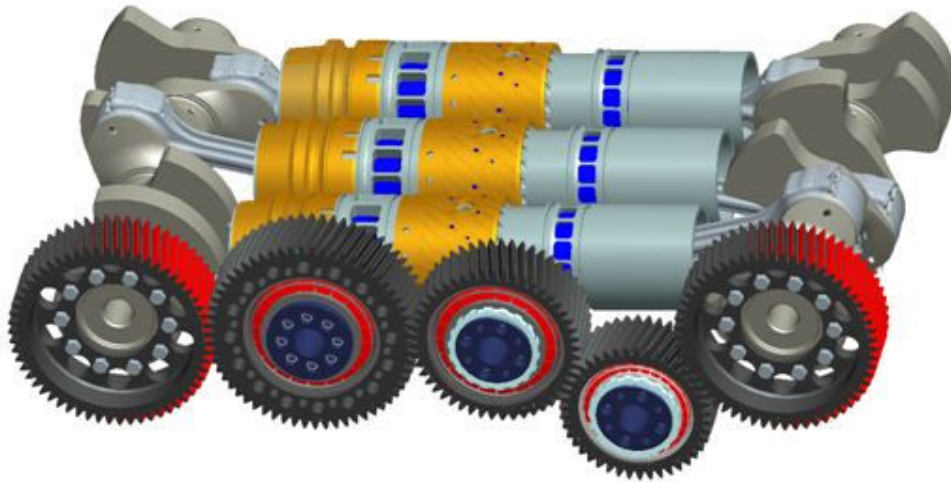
Cutaway of Power Module Concept, Showing Internal Gear Train
